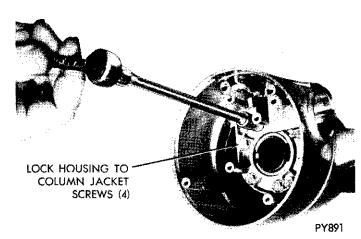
Lock Housing to Column Jacket, Retaining Screws
